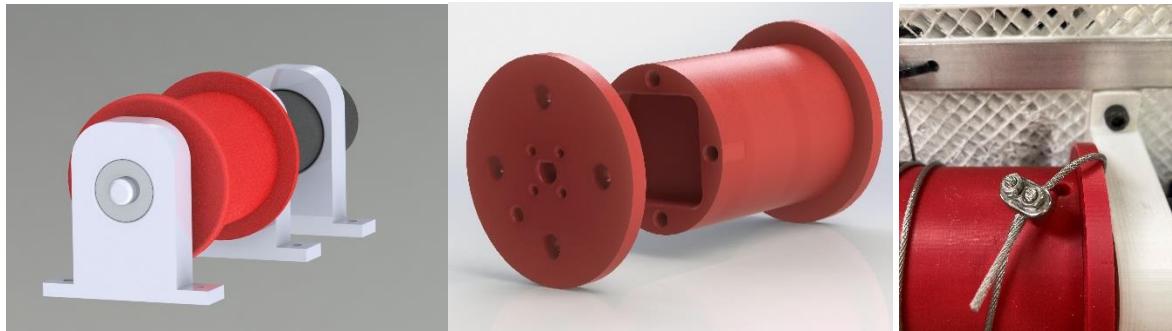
Motor and spool attached to frame mounts (left), interchangeable spool (middle), cable attachment to spool (right)
